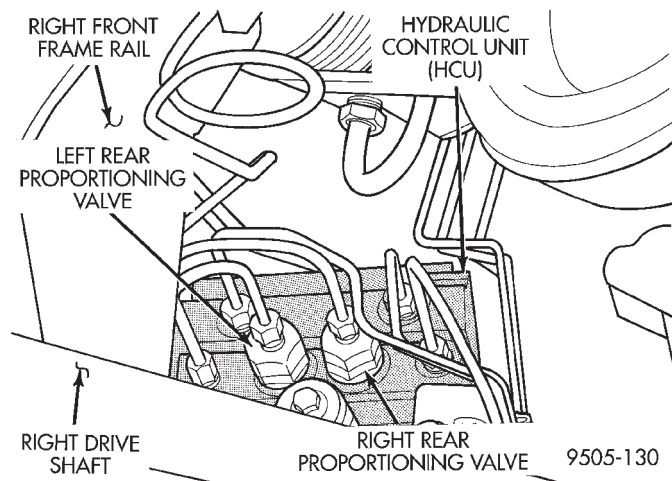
Rear Wheel Proportioning Valve Location On HCU
